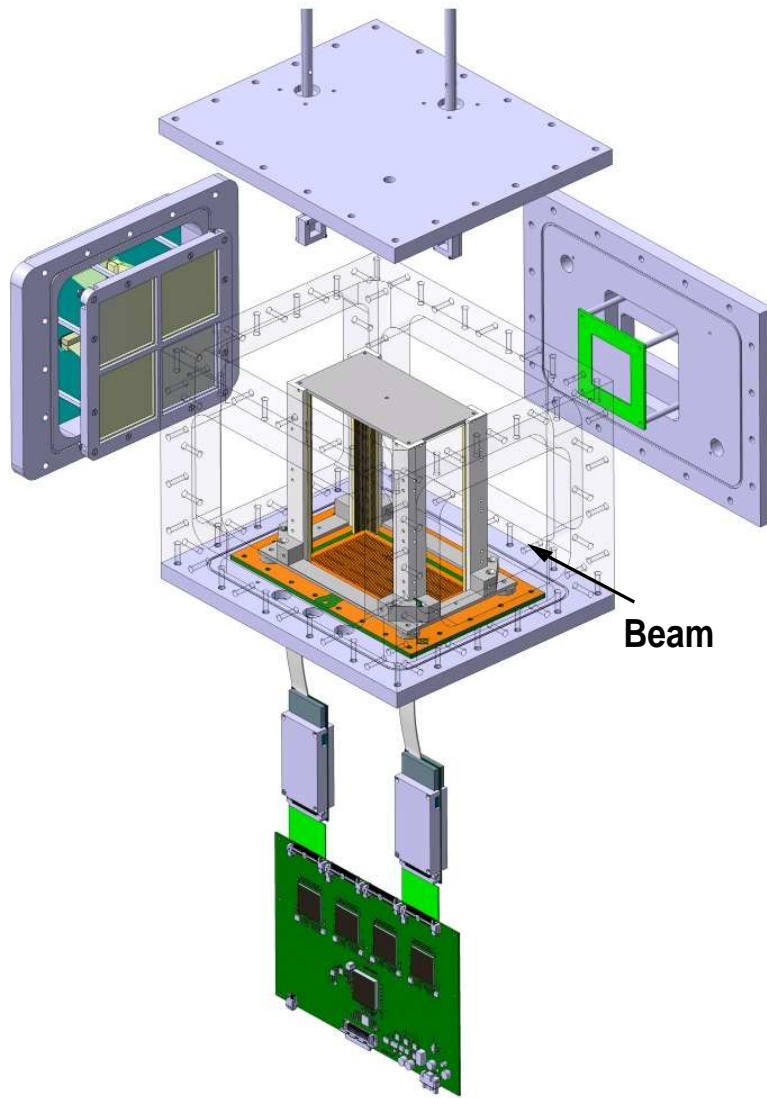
(Color online) 3D drawing of the ACTAR TPC demonstrator. The downstream (left) and the right side flanges are shown equipped with four and one double sided stripped silicon strip detectors, respectively. The top flange holds two retractable and vertically adjustable radioactive source arms. The four field cage pillars and the cathode above them are mounted on the pad plane (bottom flange). Outside the chamber and situated below the pad plane, the connection of a single front end electronics card via two spark-protection circuits is shown. A total of 8 cards are required to process the 2048 channels of the demonstrator.
